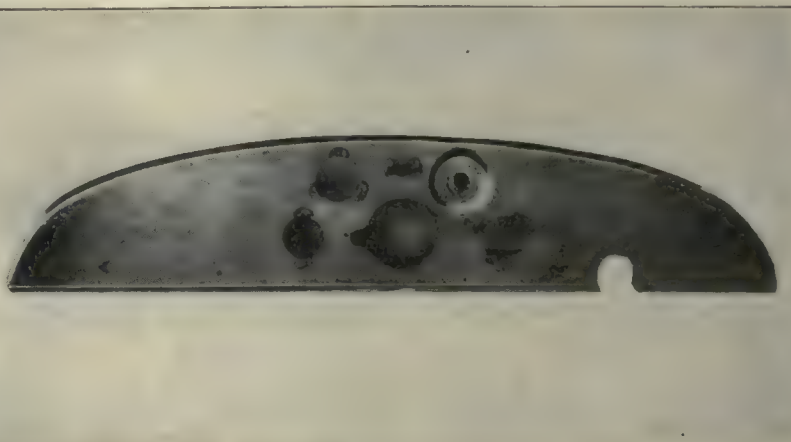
AN AUTOMOBILE INSTRUMENT-BOARD COVER MADE UP BY SPOT WELDING
